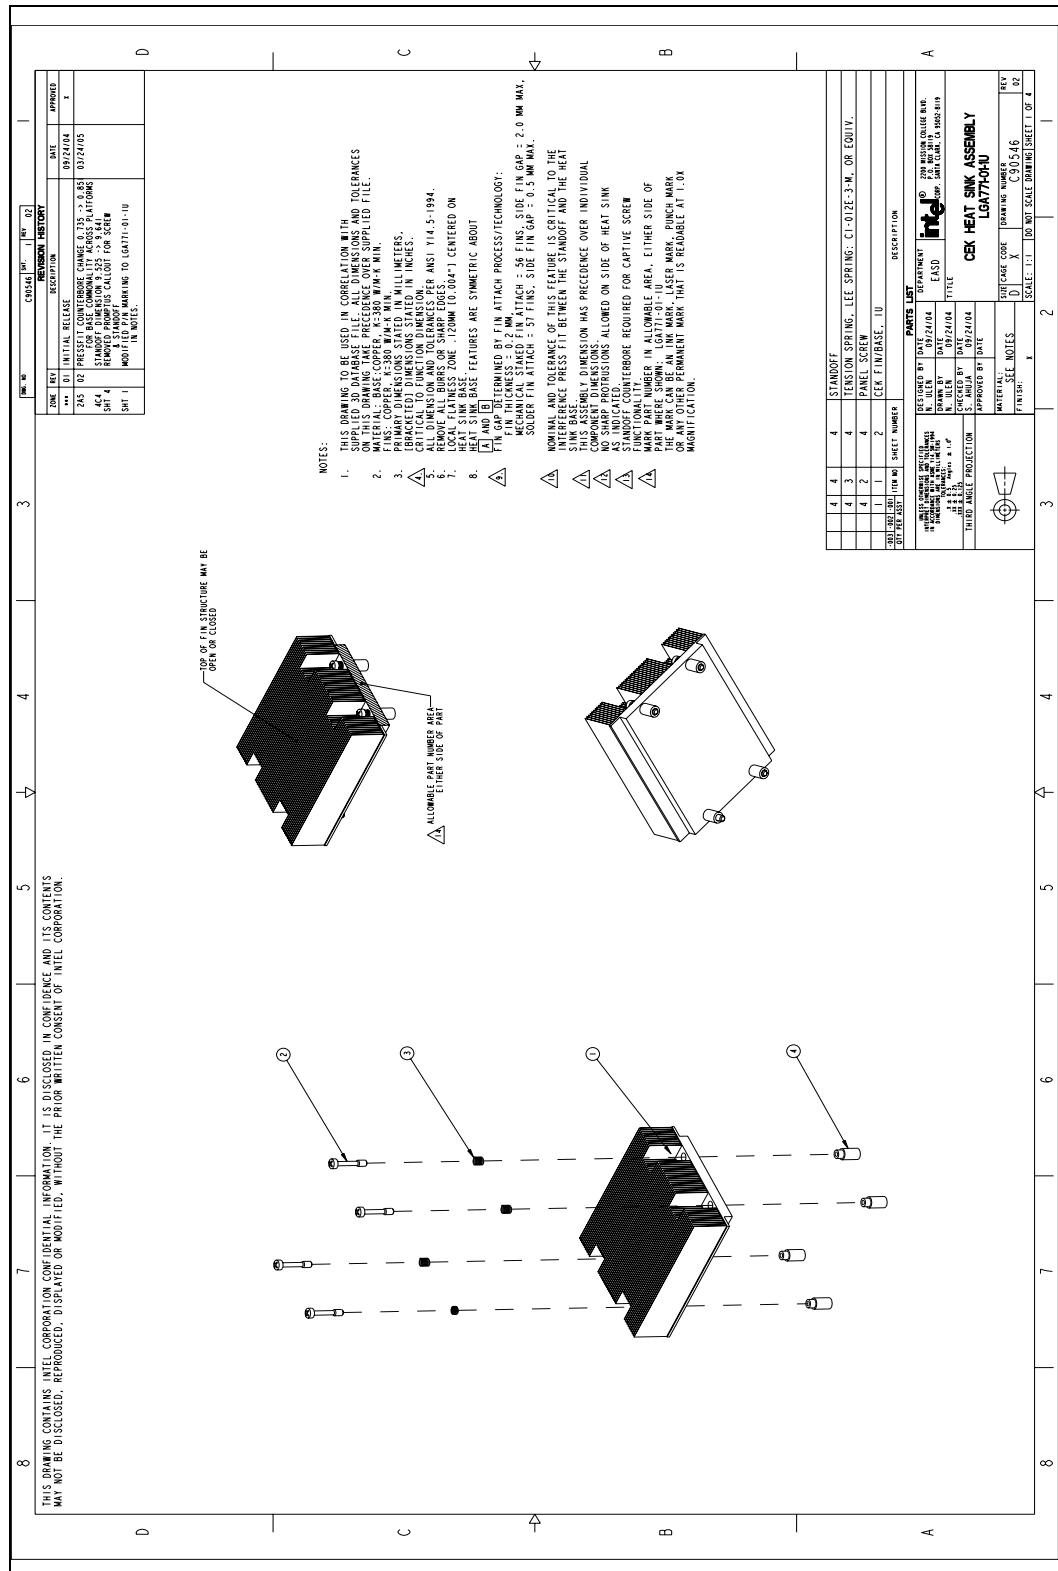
1U CEK Heatsink (Sheet 3 of 4)
